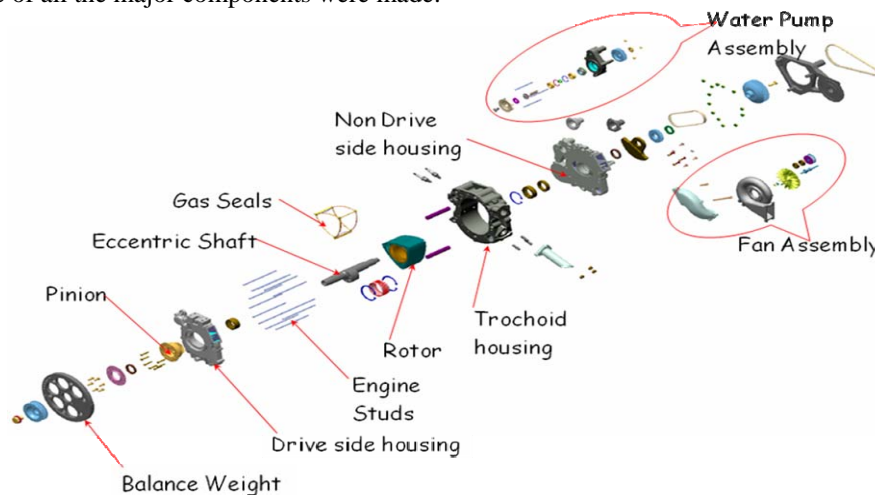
Exploded view of the 55 hp indigenous Wankel engine
